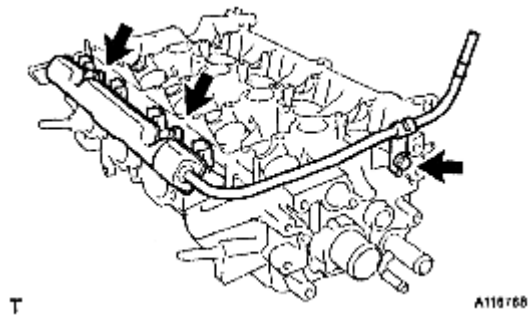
Locating Fuel Delivery Pipe Sub-Assembly With Fuel Injectors
